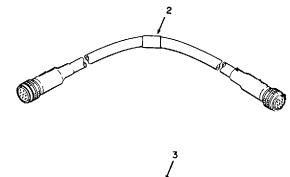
SHILLELAGH supplemental equipment – view 1.
